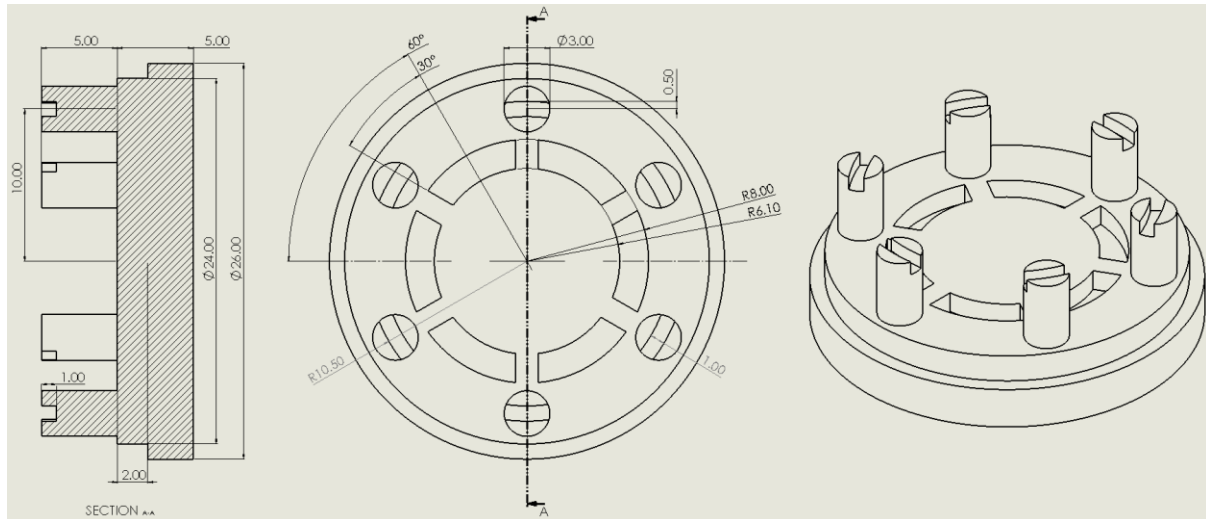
Assisting structures used for fixating threads. From left to right: a) cross-section b) top view c) isometric view.
